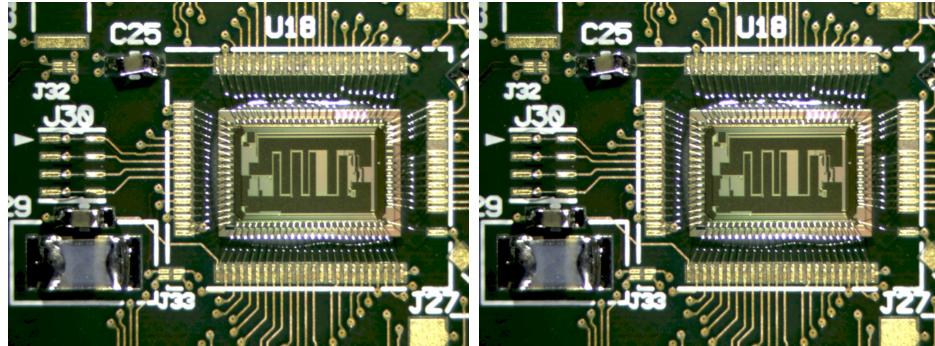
Photograph of the visual inspection of a HDI shwing the bondpads of the TBM (left) and of a ROC (right)
